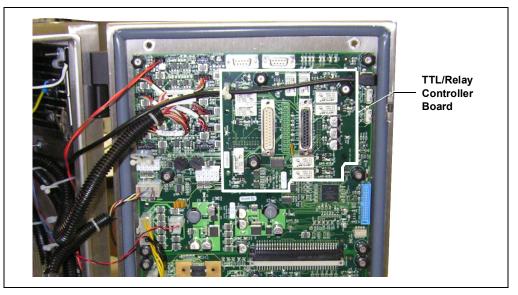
Main SP Electronics Board: TTL/Relay Controller Board Installed (Vertical SP Enclosure Shown)
